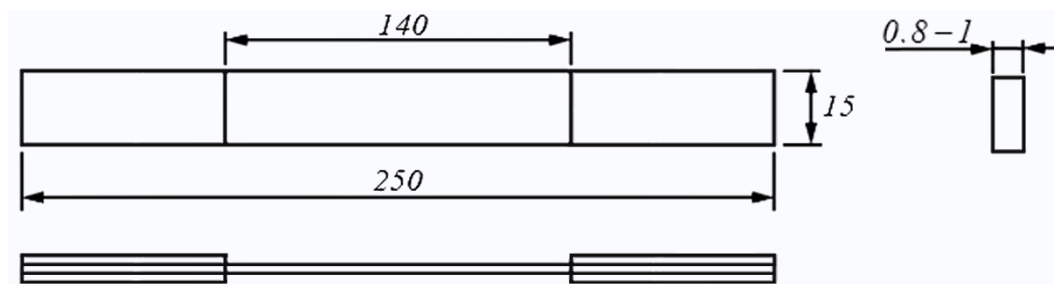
Geometry and dimensions of specimens and tabs (mm)
